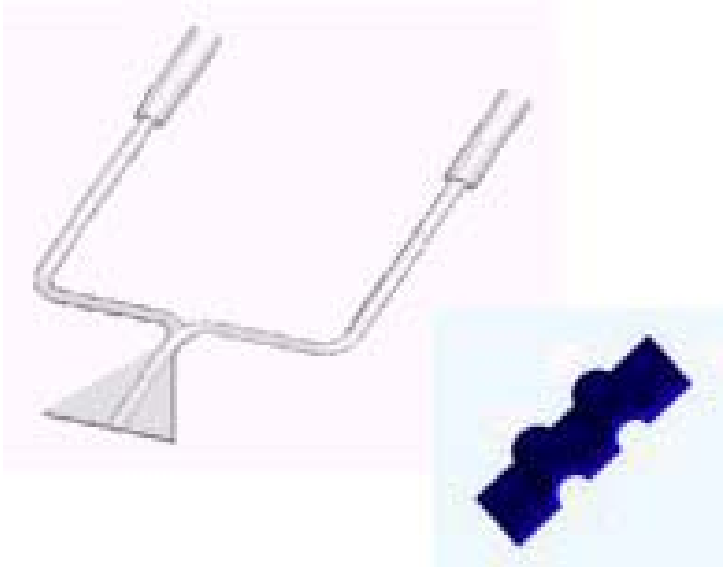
Sketch of the Braking Mechanism and Clasp for Attaching the Brake to the Sit-Ski Frame.
